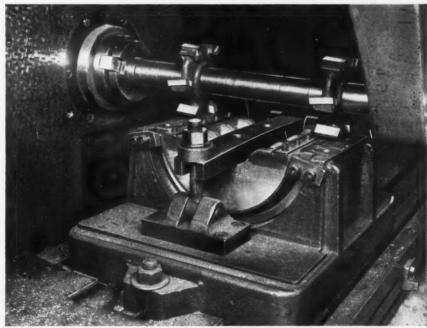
(Center) The joint of a bearing is milled a few thousandths inch above the center so that when two halves are assembled the bearing is forced to conform to the supporting wall.
